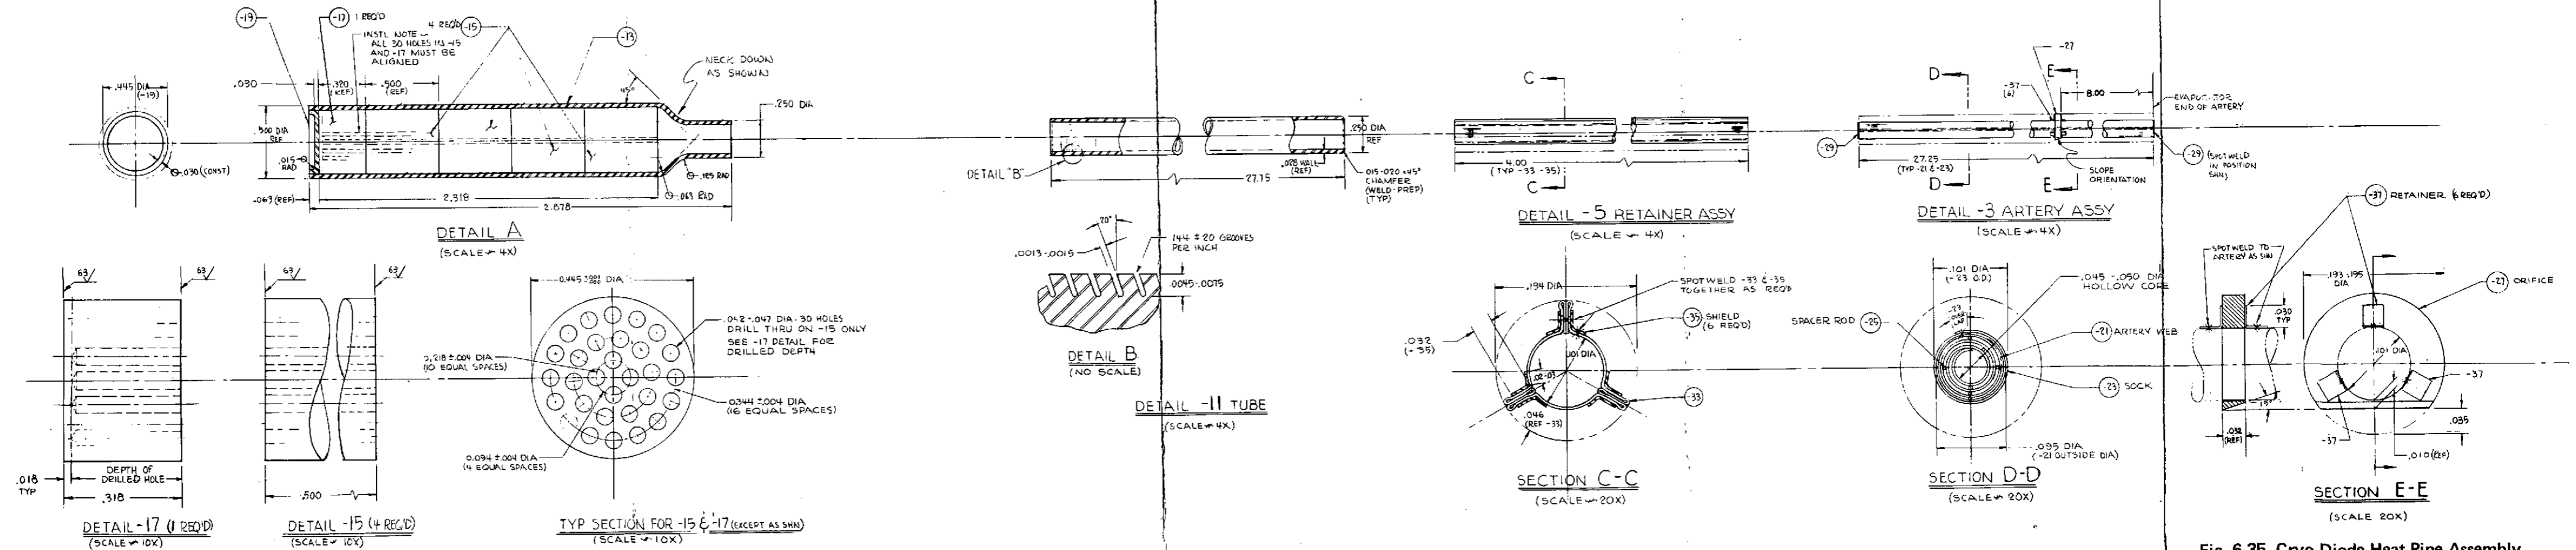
Cryo Diode Heat Pipe Assembly
